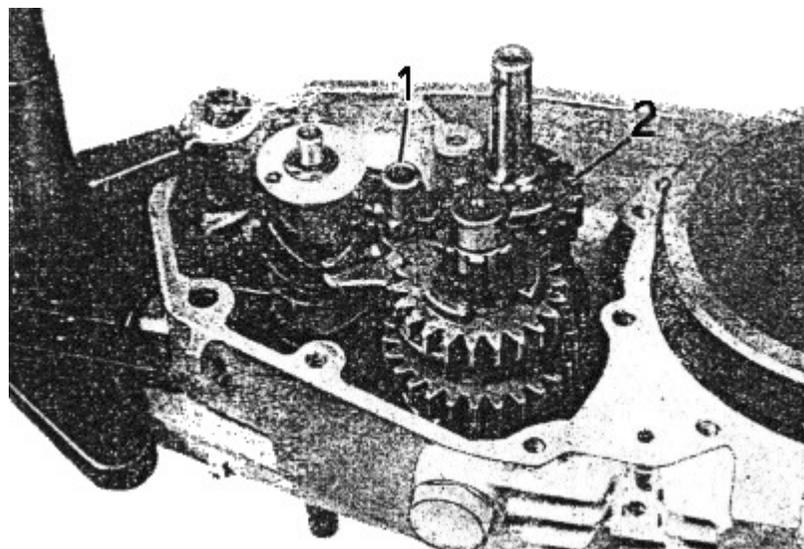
Mounting the gear-shift wheel of 4th/5th speeds
